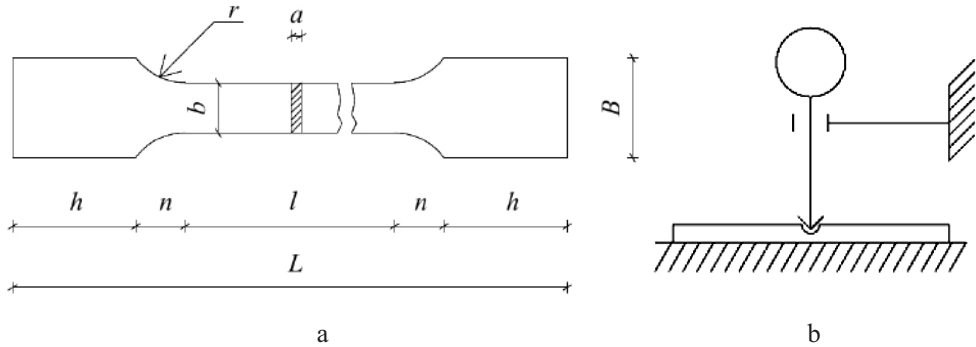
Scheme of specimen for tensile test (a) and measurement scheme of corrosion depth (b).
